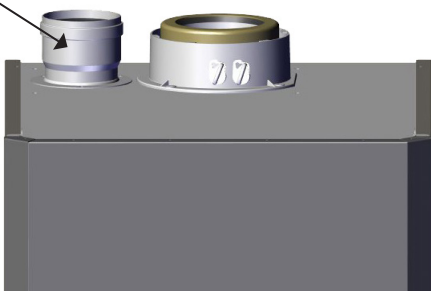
Coaxial to Twin Pipe Adapter Kit
